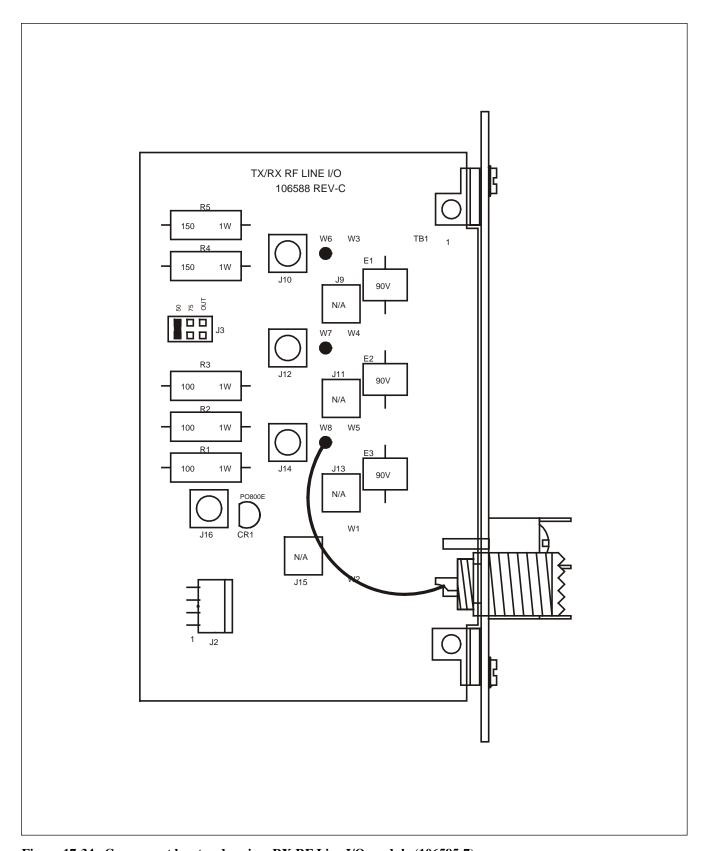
Component locator drawing, RX RF Line I/O module (106585-7)
